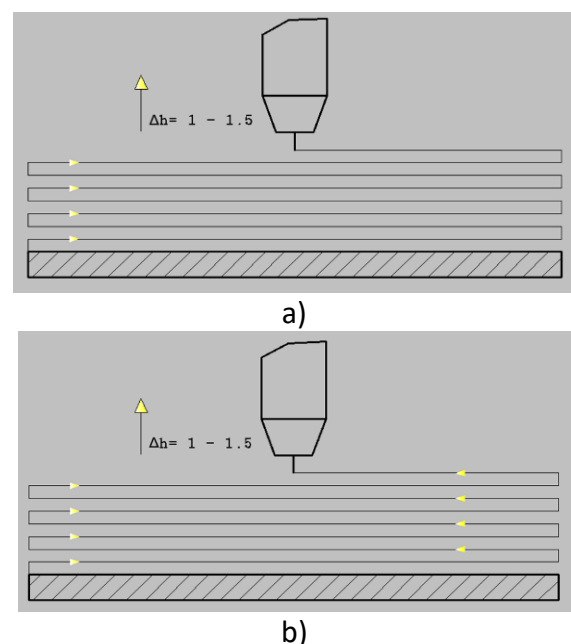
Welding strategies: a) welding in one direction indicated by arrow (specimen 1); b) welding in both directions (specimens 2, 3)
